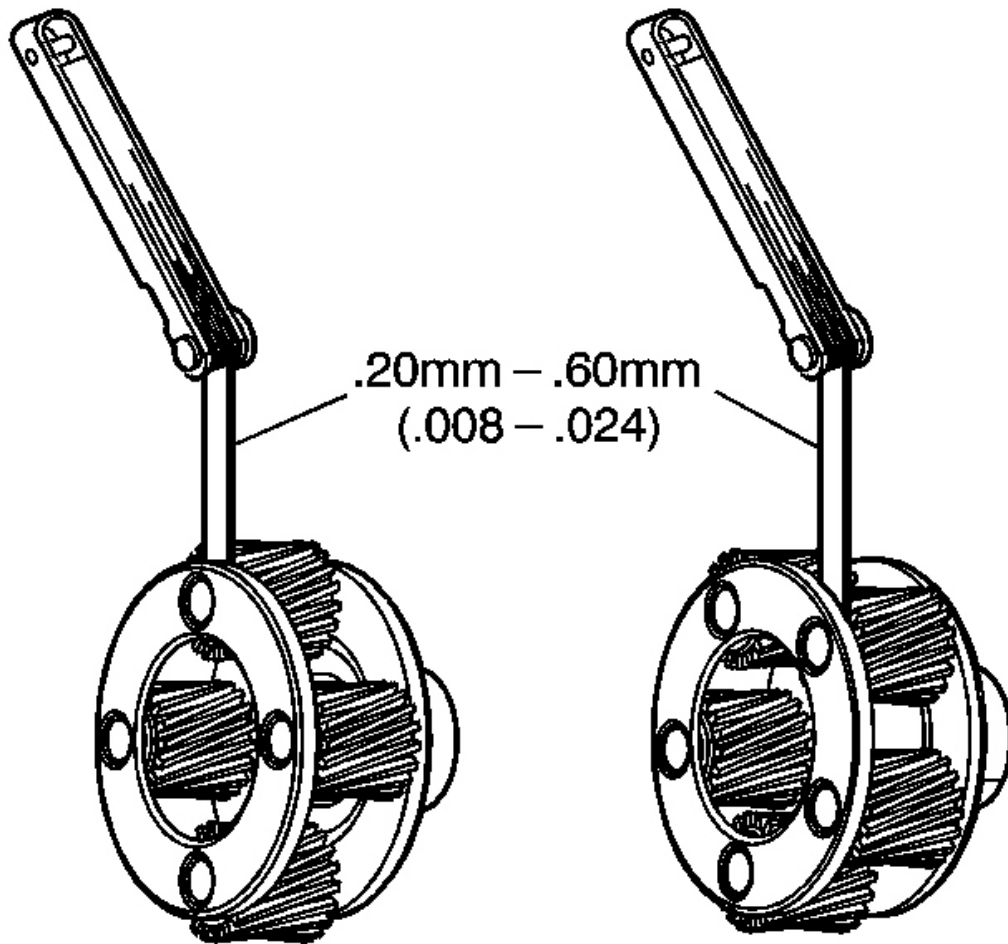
Identifying Input Carrier Pinion End Play Measurements
